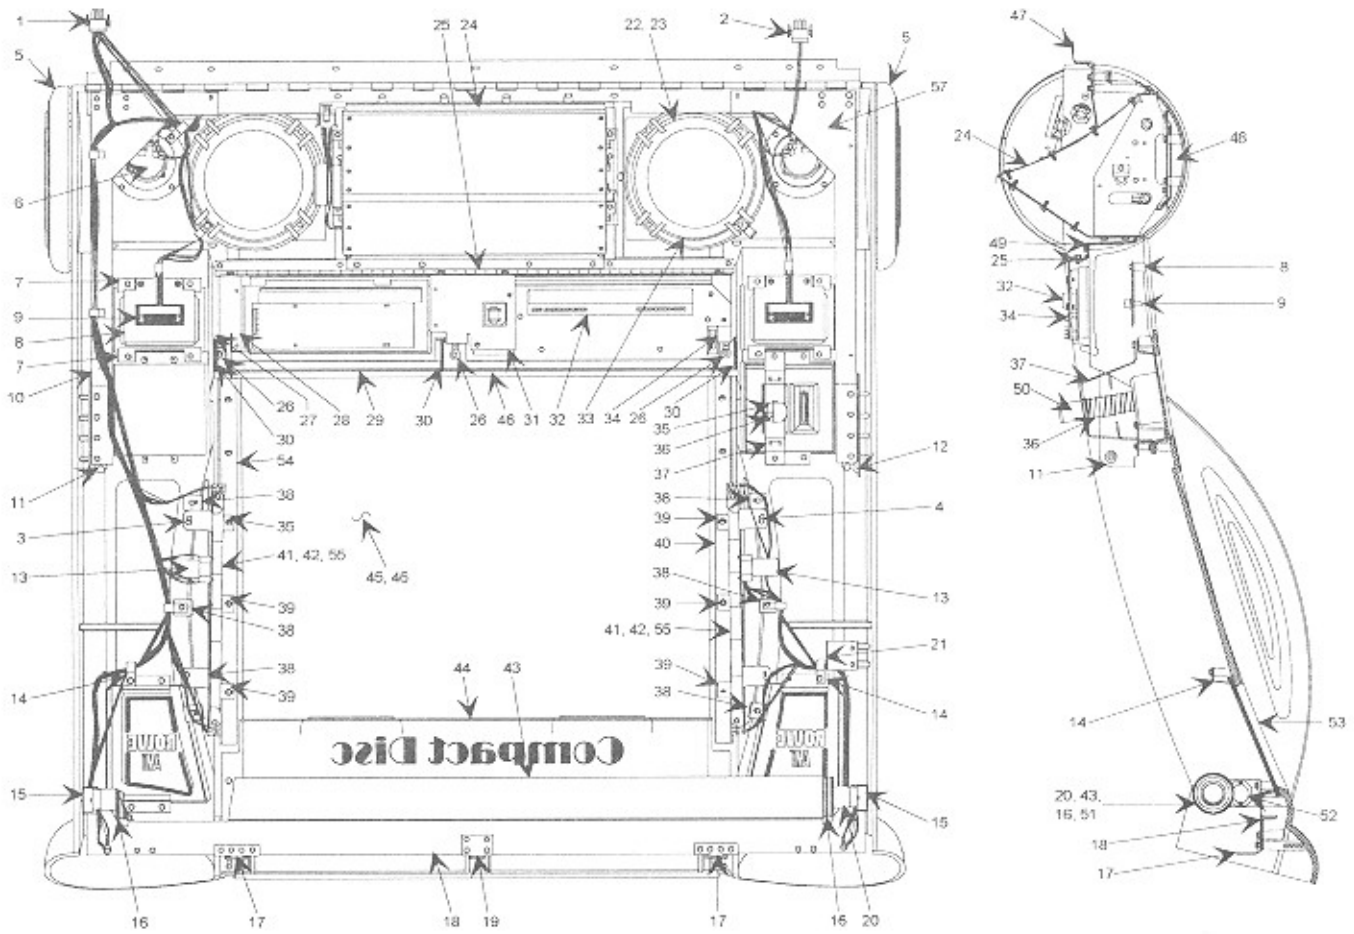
CD-100F Top Door Assembly (Sheet 2)
